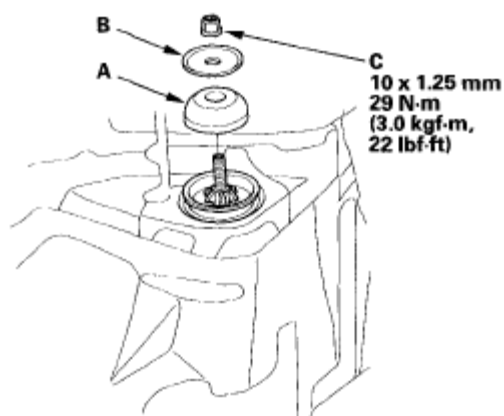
Identifying Damper Mounting Bushing (With Torque Specifications)
